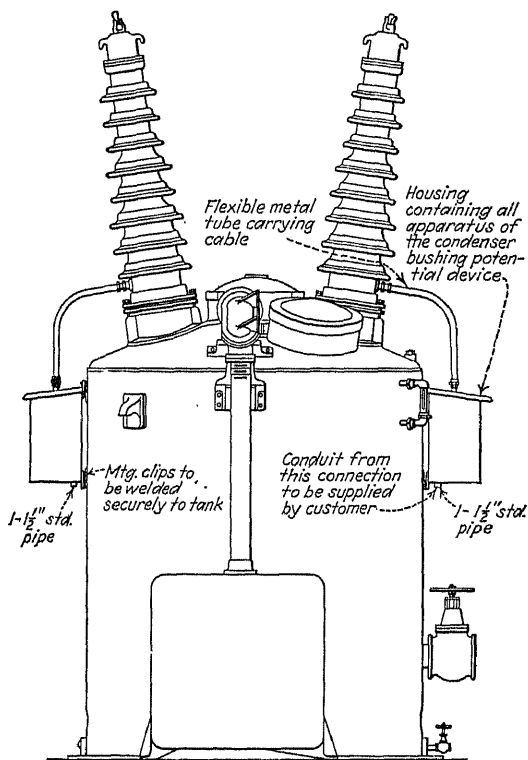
Assembly of potential device on Westinghouse oil circuit breaker.
